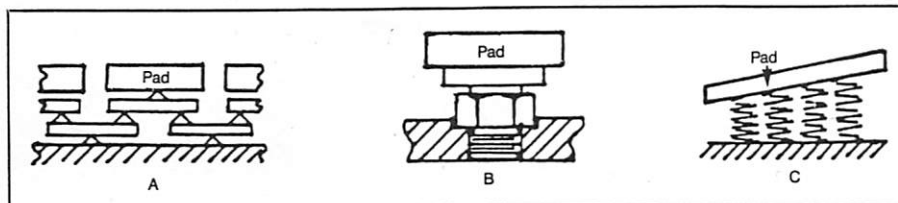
Alternative methods of pad mounting include (A) a self-leveling pad equalizing system used by some manufacturers. (Although more expensive, the more complex mount is easy to install and provides improved self-aligning capabilities); (B) a pad pivoted on a jack screw, a technique commonly used for very large bearings. At the site, each pad is jacked up to the thrust runner (also called "collar") surface, and fixed when all pad surfaces are in exactly the same plane. This design can help stabilize the generator rotor; and (C) each pad mounted on a spring-bed mattress, which provides freedom to tilt and equalize, and some ability to self align.
